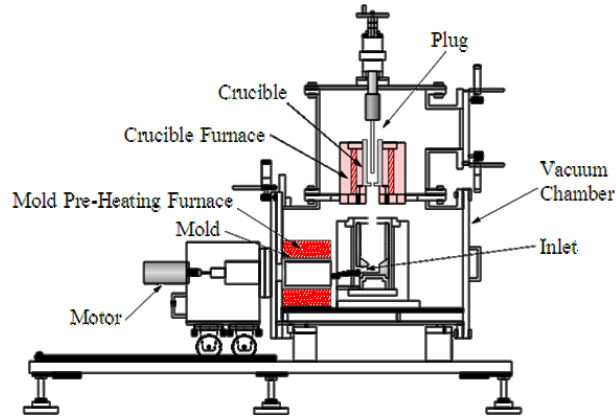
Schematic illustration of the vacuum centrifugal caster. Shape of casts obtained by this caster is ring or pipe.
